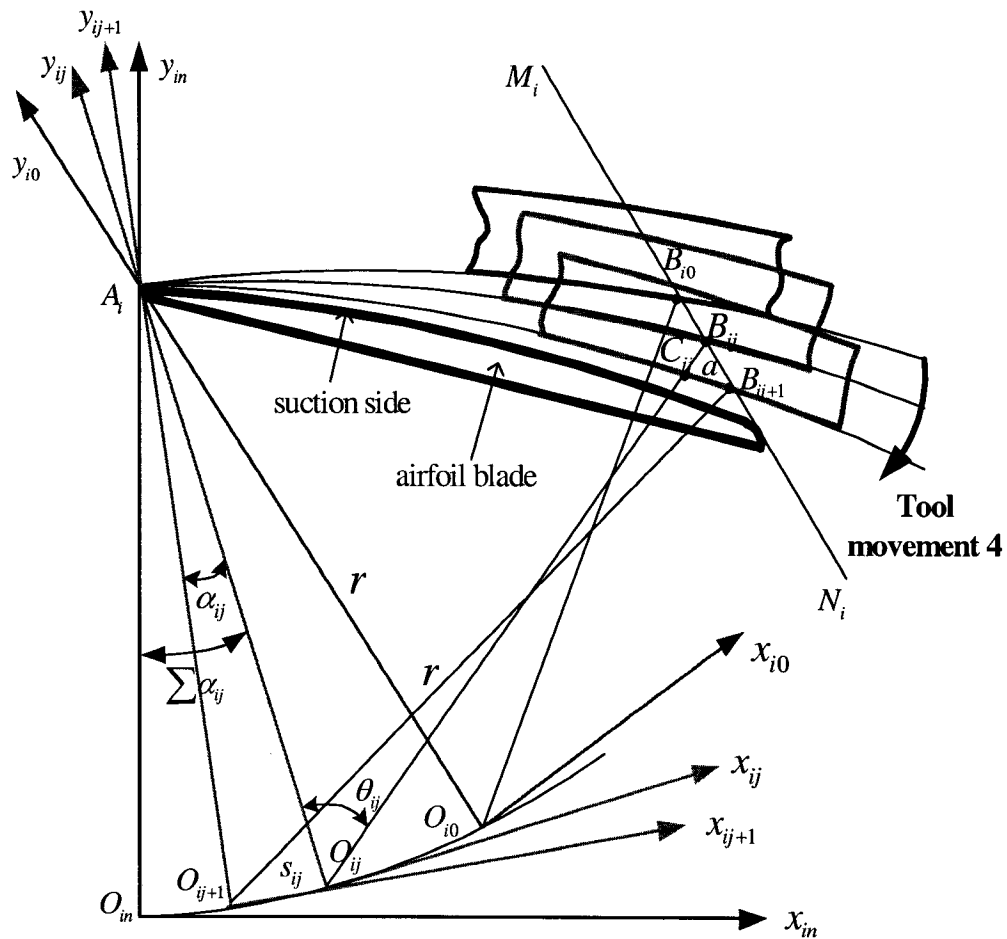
Tool movement 4 - the rotation of the tool centre around the interior point,  $A_i$ , and the machining done with the inner side of the tool
